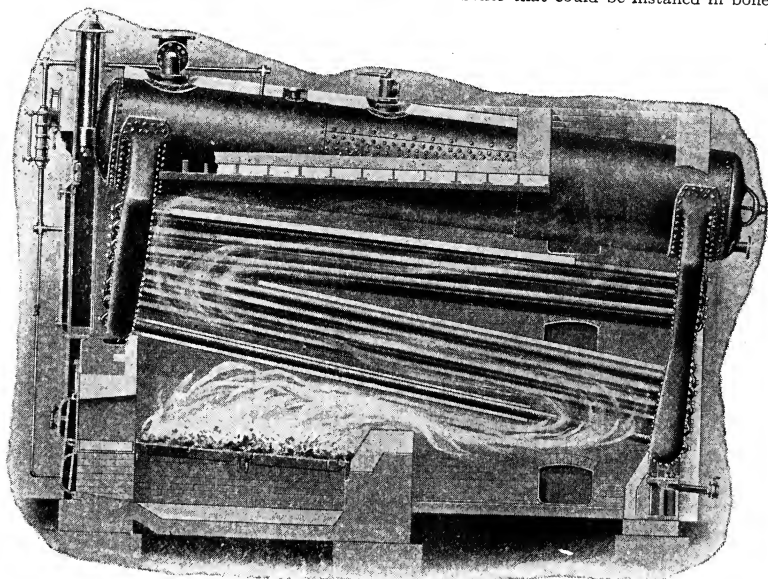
,690.—Casey-Hedges non-sectional horizontal boiler. The baffles are so arranged that there are two passes of the hot gases through the tubes and can be adjusted to draught
